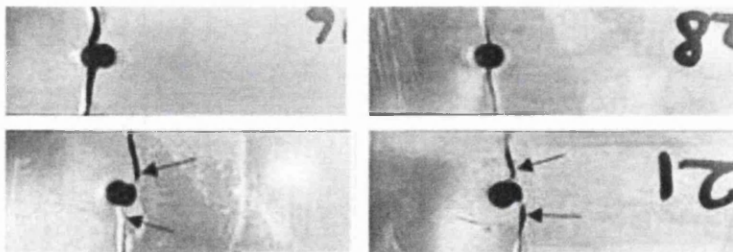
Typical bolt hole failures in specimens with initial clamping force of 1.15 kN (Top) and initial clamping force of 11.8 kN (bottom) and applied maximum gross axial stress of: (a) 144 and (b) 210 MPa. Note how the crack position changes with increasing initial clamping force¹⁰⁹.
